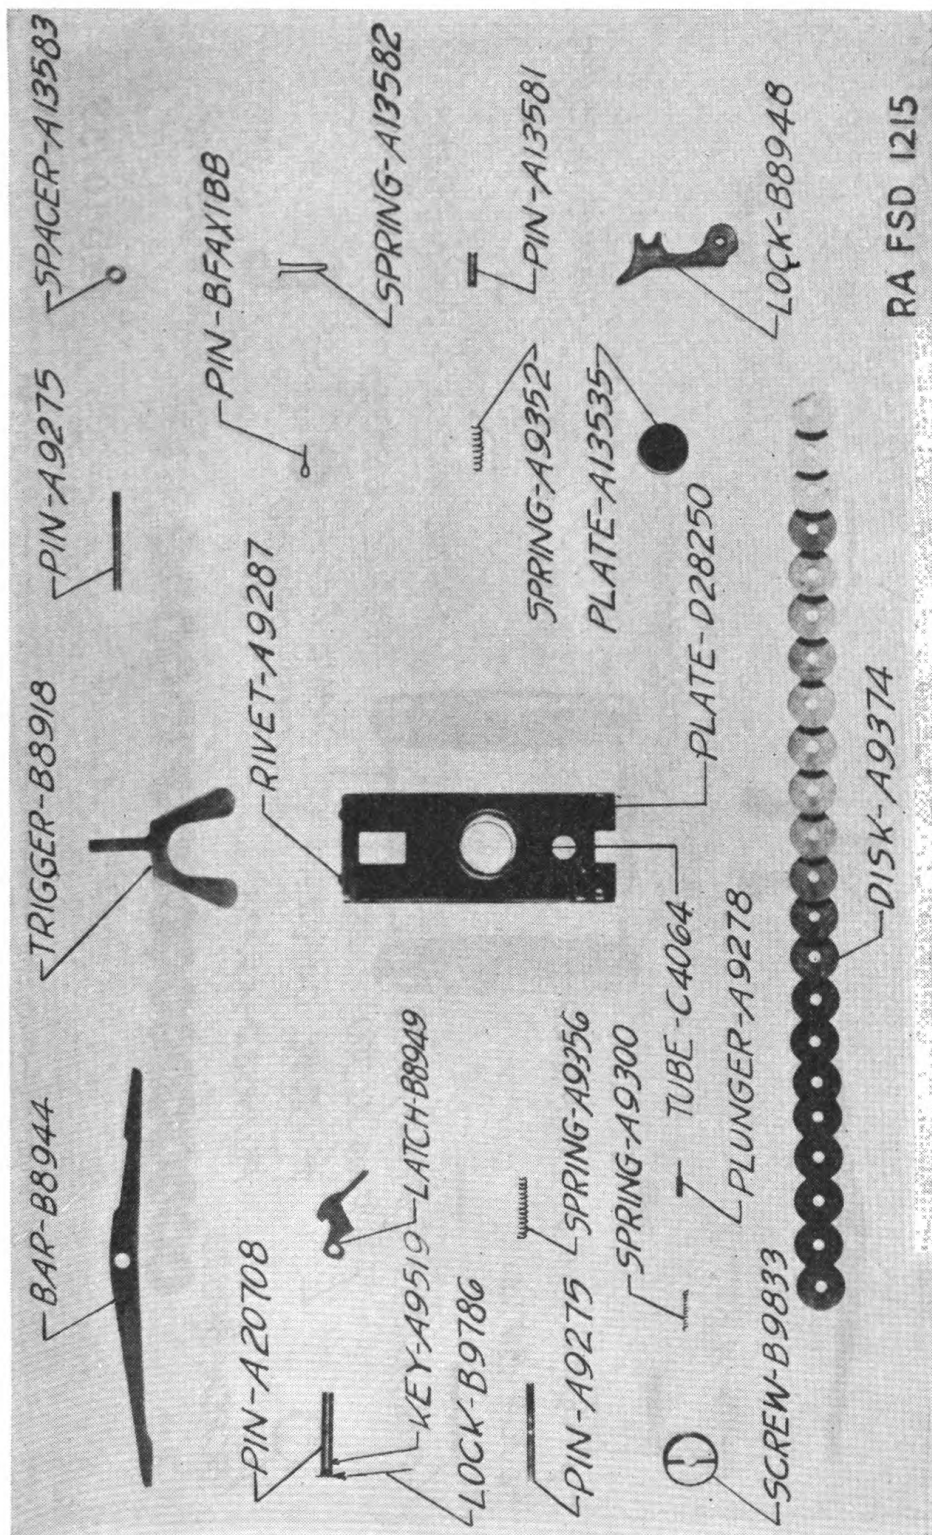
Back plate for use on anti-aircraft machine-gun mount, caliber .50, M2.
